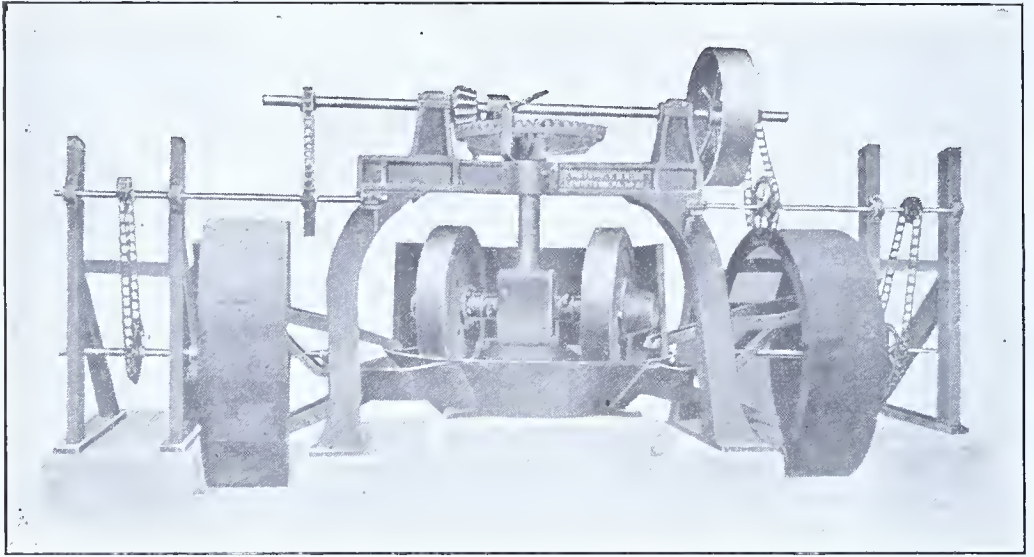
Standard 8-foot Chaser Mill and Screens as built by Lewistown Foundry and Machine Company.
